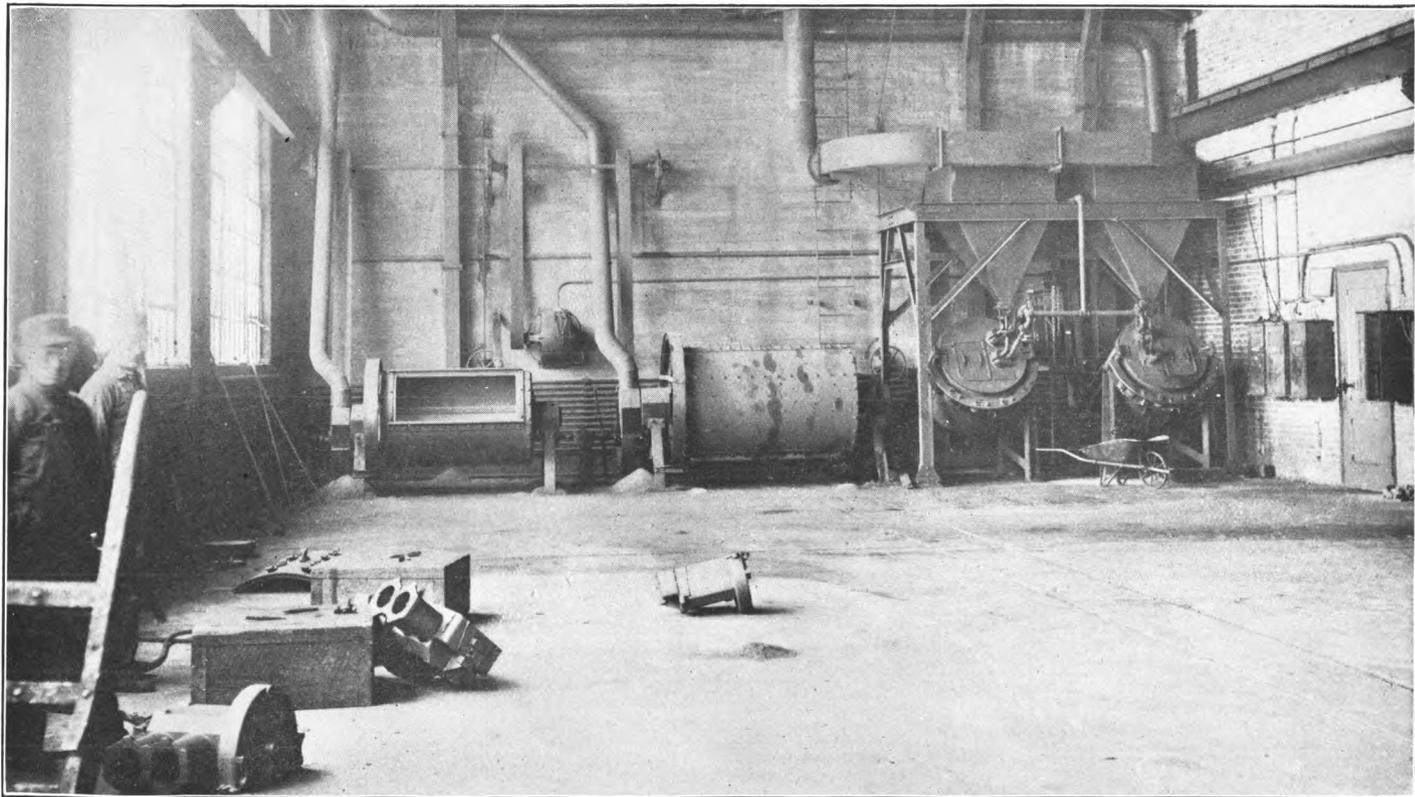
TUMBLER AND SAND-BLASTING MACHINES, WITH EXHAUSTS.
